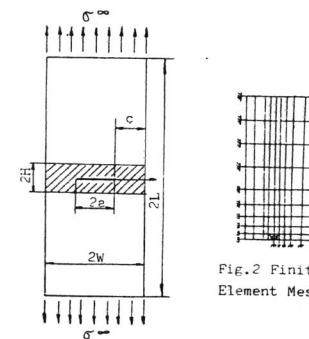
Configuration of Welded Center-cracked Specimen
